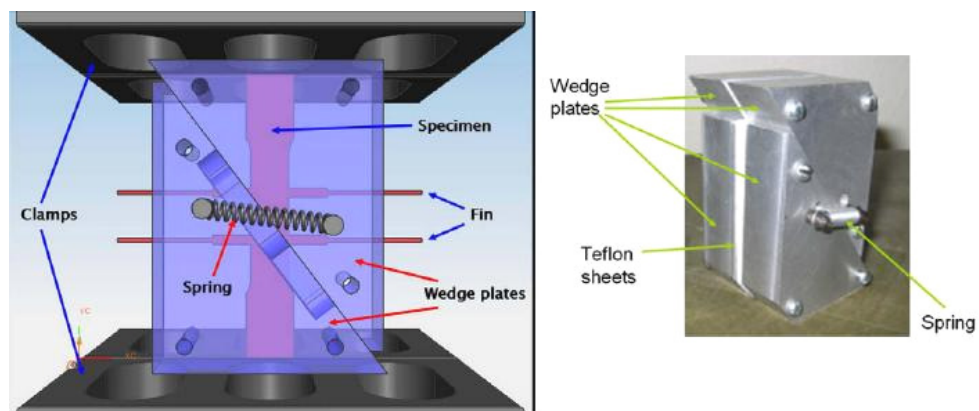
Schematic of the flat plate supports and sample dimensions (left) and assembly of new plate test (right) (Boger et al., 2005).
